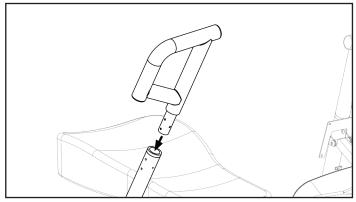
Slide the Upper Right Handle into the top of the Lower Right Handle and align the screw holes.
